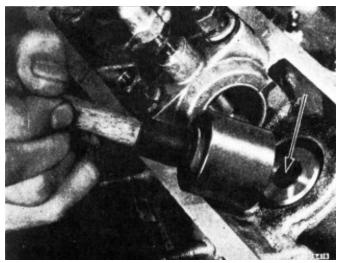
Withdrawing a tappet with a valve grinding suction tool. The adjusting shim is indicated by the arrow
